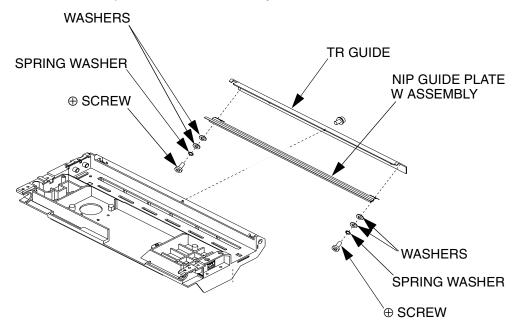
Removal of the Nip Guide Plate W Assembly
